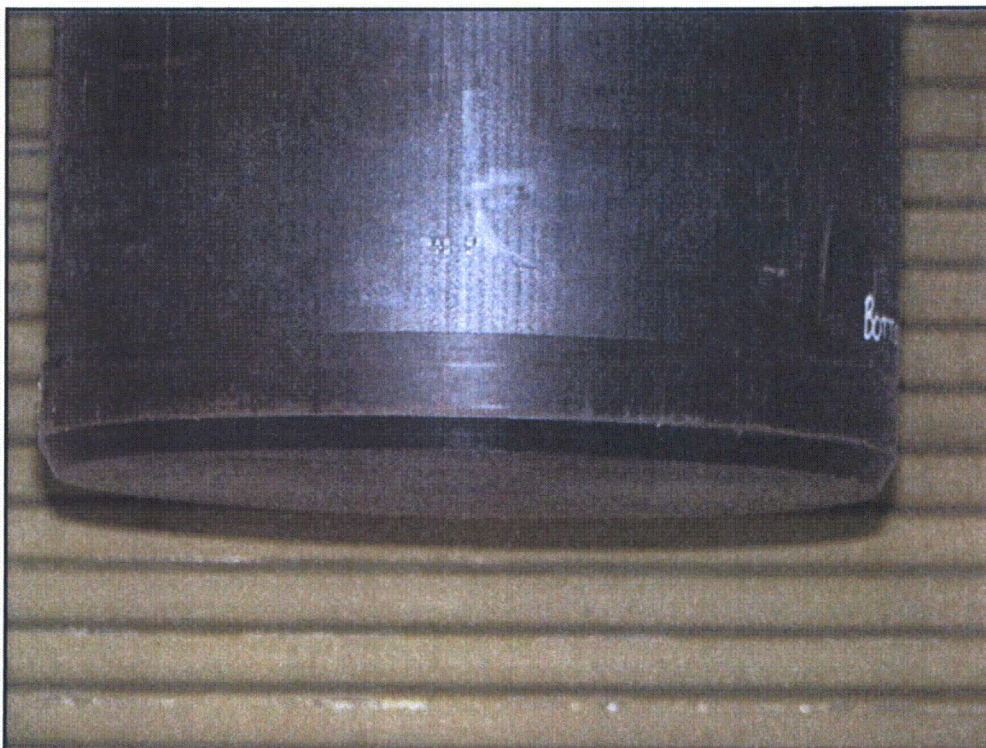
View of Bottom End Cap and Pipe Body During Removal from Canister
